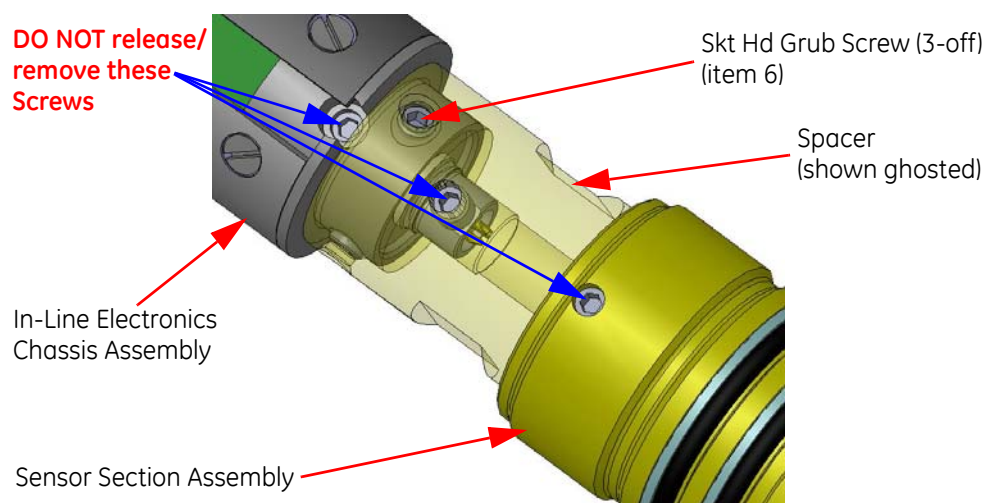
Identification of three Skt Hd Grub Screws to be removed
